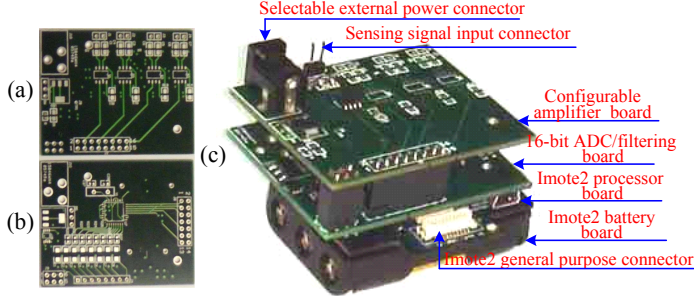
The high fidelity sensing module: (a) Configurable amplifier board; (b) 16-bit ADC/filtering board; (c) Assembled stack of the sensing module and the Imote2 processor package.
